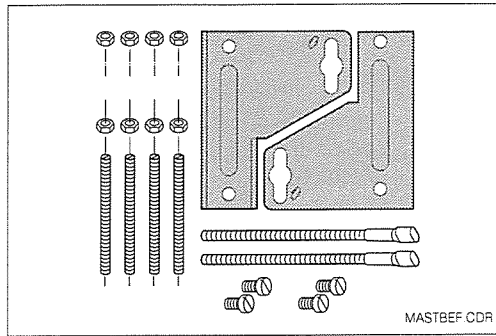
Mounting kit for panel installation and post mounting (order no. 50061357)
